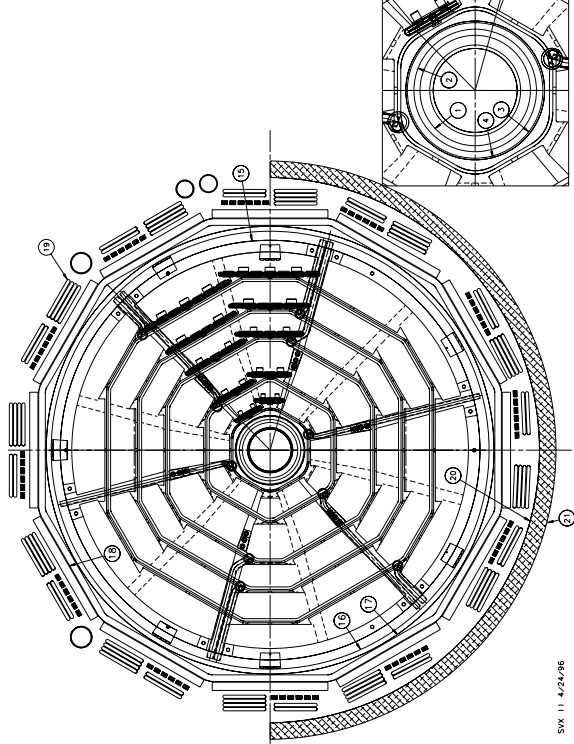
The SVX-II bulkhead design. The bulkhead is constructed from precision-machined beryllium, and locates 60 silicon microstrip ‘ladders’ arranged in 12 wedges and 5 layers [8].
